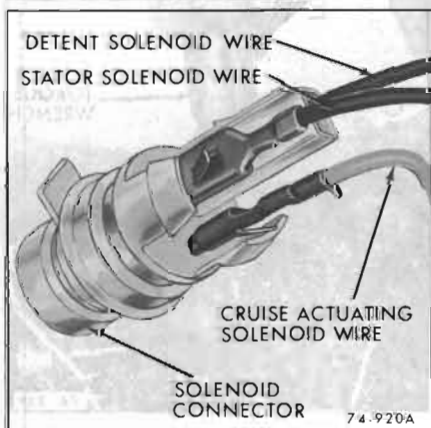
Installing Stator, Detent and Actuating Solenoid Wires
